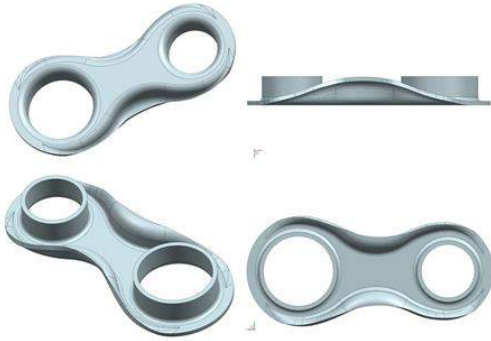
Sheet Metal Control Arm – 3D Cad Design
